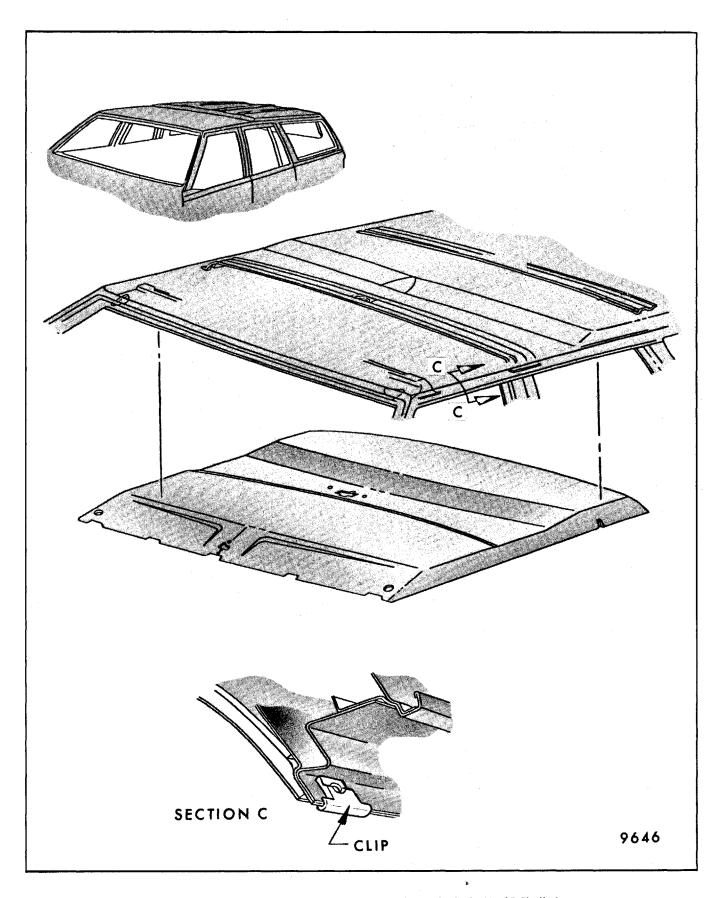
Headlining Front Section Assembly - B-35 Style (A- 35 Similar)
